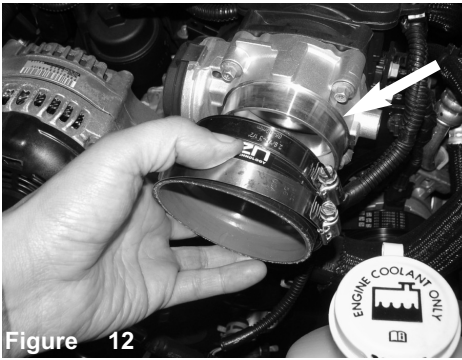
Now install the step hose with clamps provided to the throttle body. Tighten the clamp on the throttle body using 8mm nut driver.
